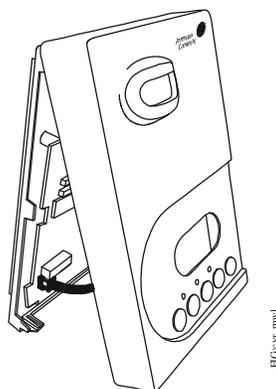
Removing the Thermostat Controller Cover (TEC2101-4+PIR Model Shown)
